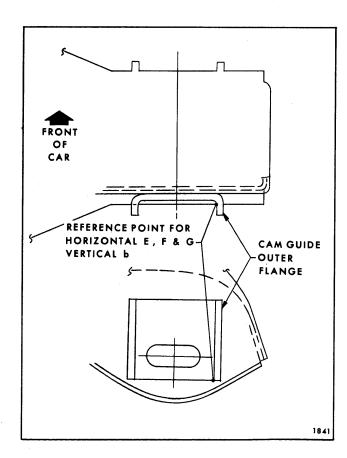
Lower Control Arm Adjusting Cam Guide
